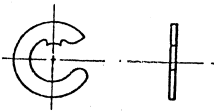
Plastic C-washer used to supply core drive and tension.
